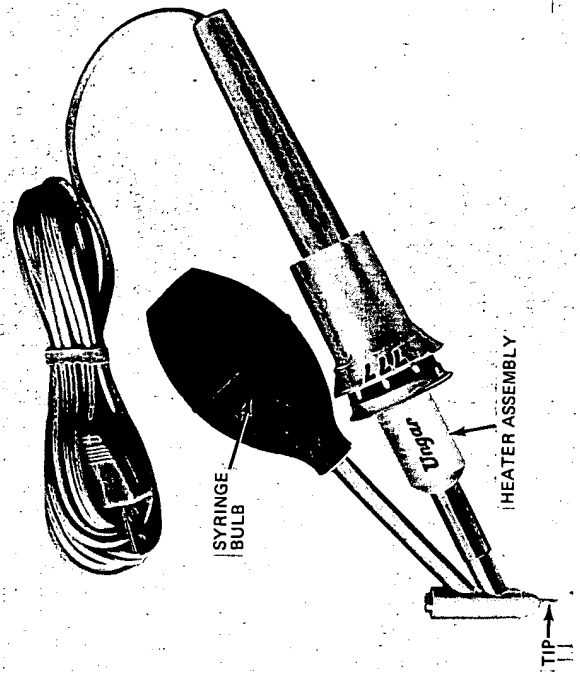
Syringe-type de-soldering tool. (Ungar Electric Tools)
